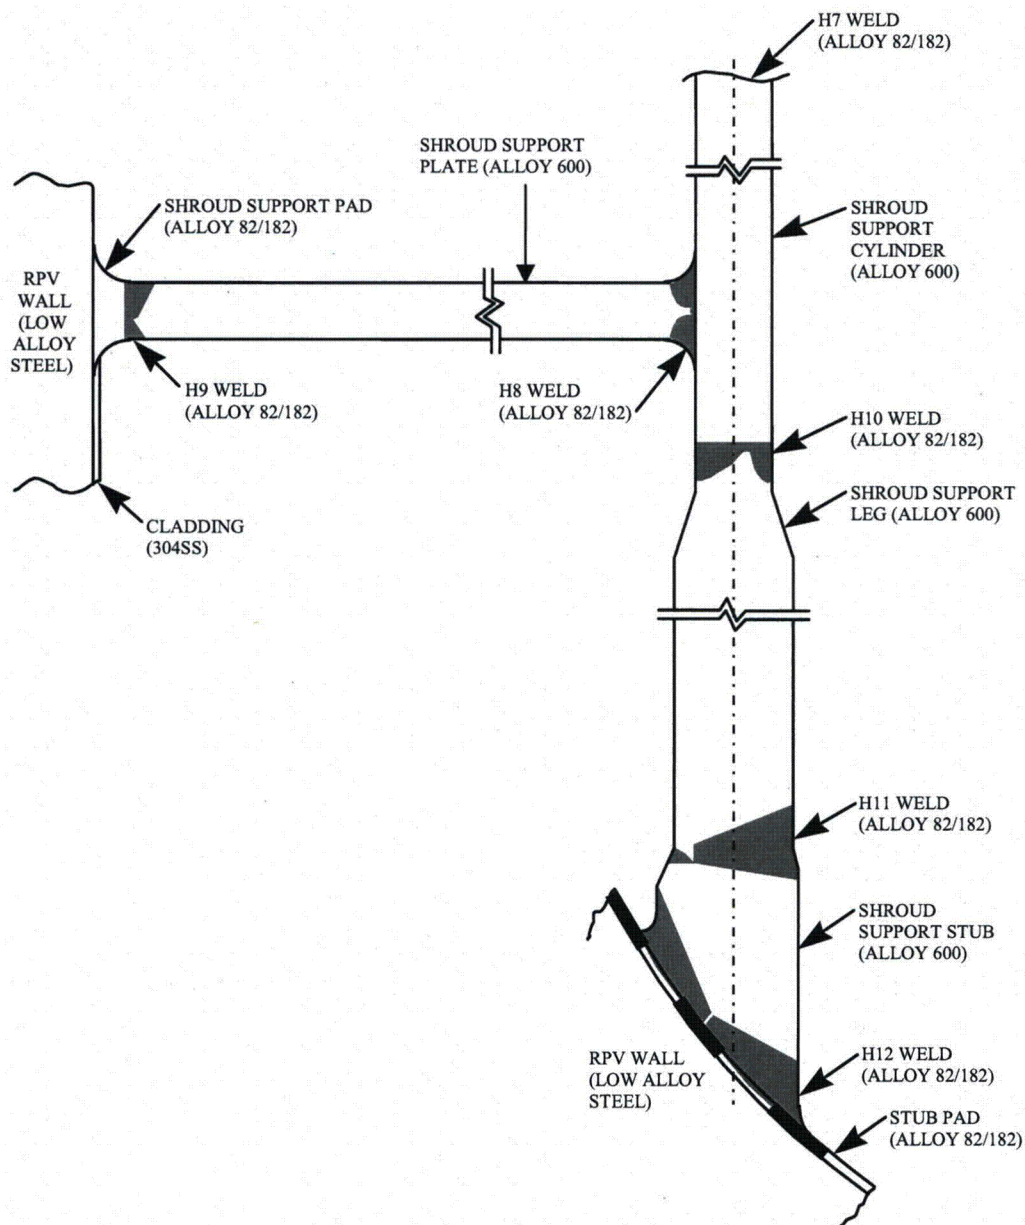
Typical BWR shroud support structure of the leg design. Alloy 182 is used. Also shown are the H9 and H12 welds that join the component to the RPV.
